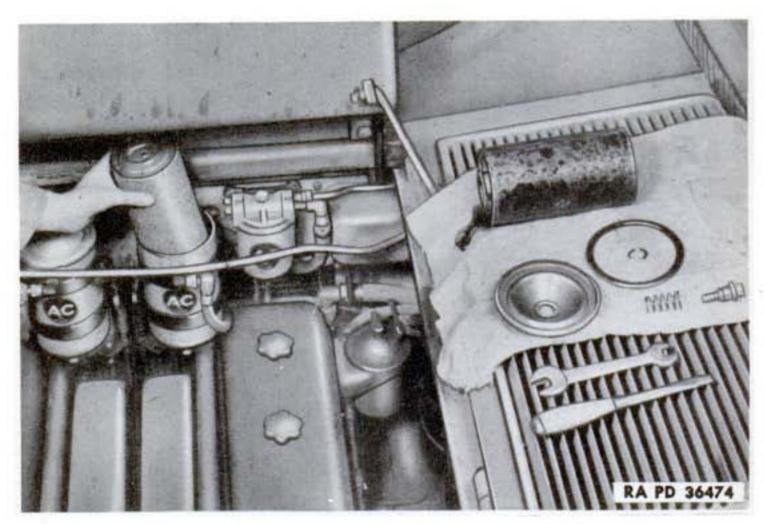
Replacing Engine Lubricating Oil Fiiter Element
